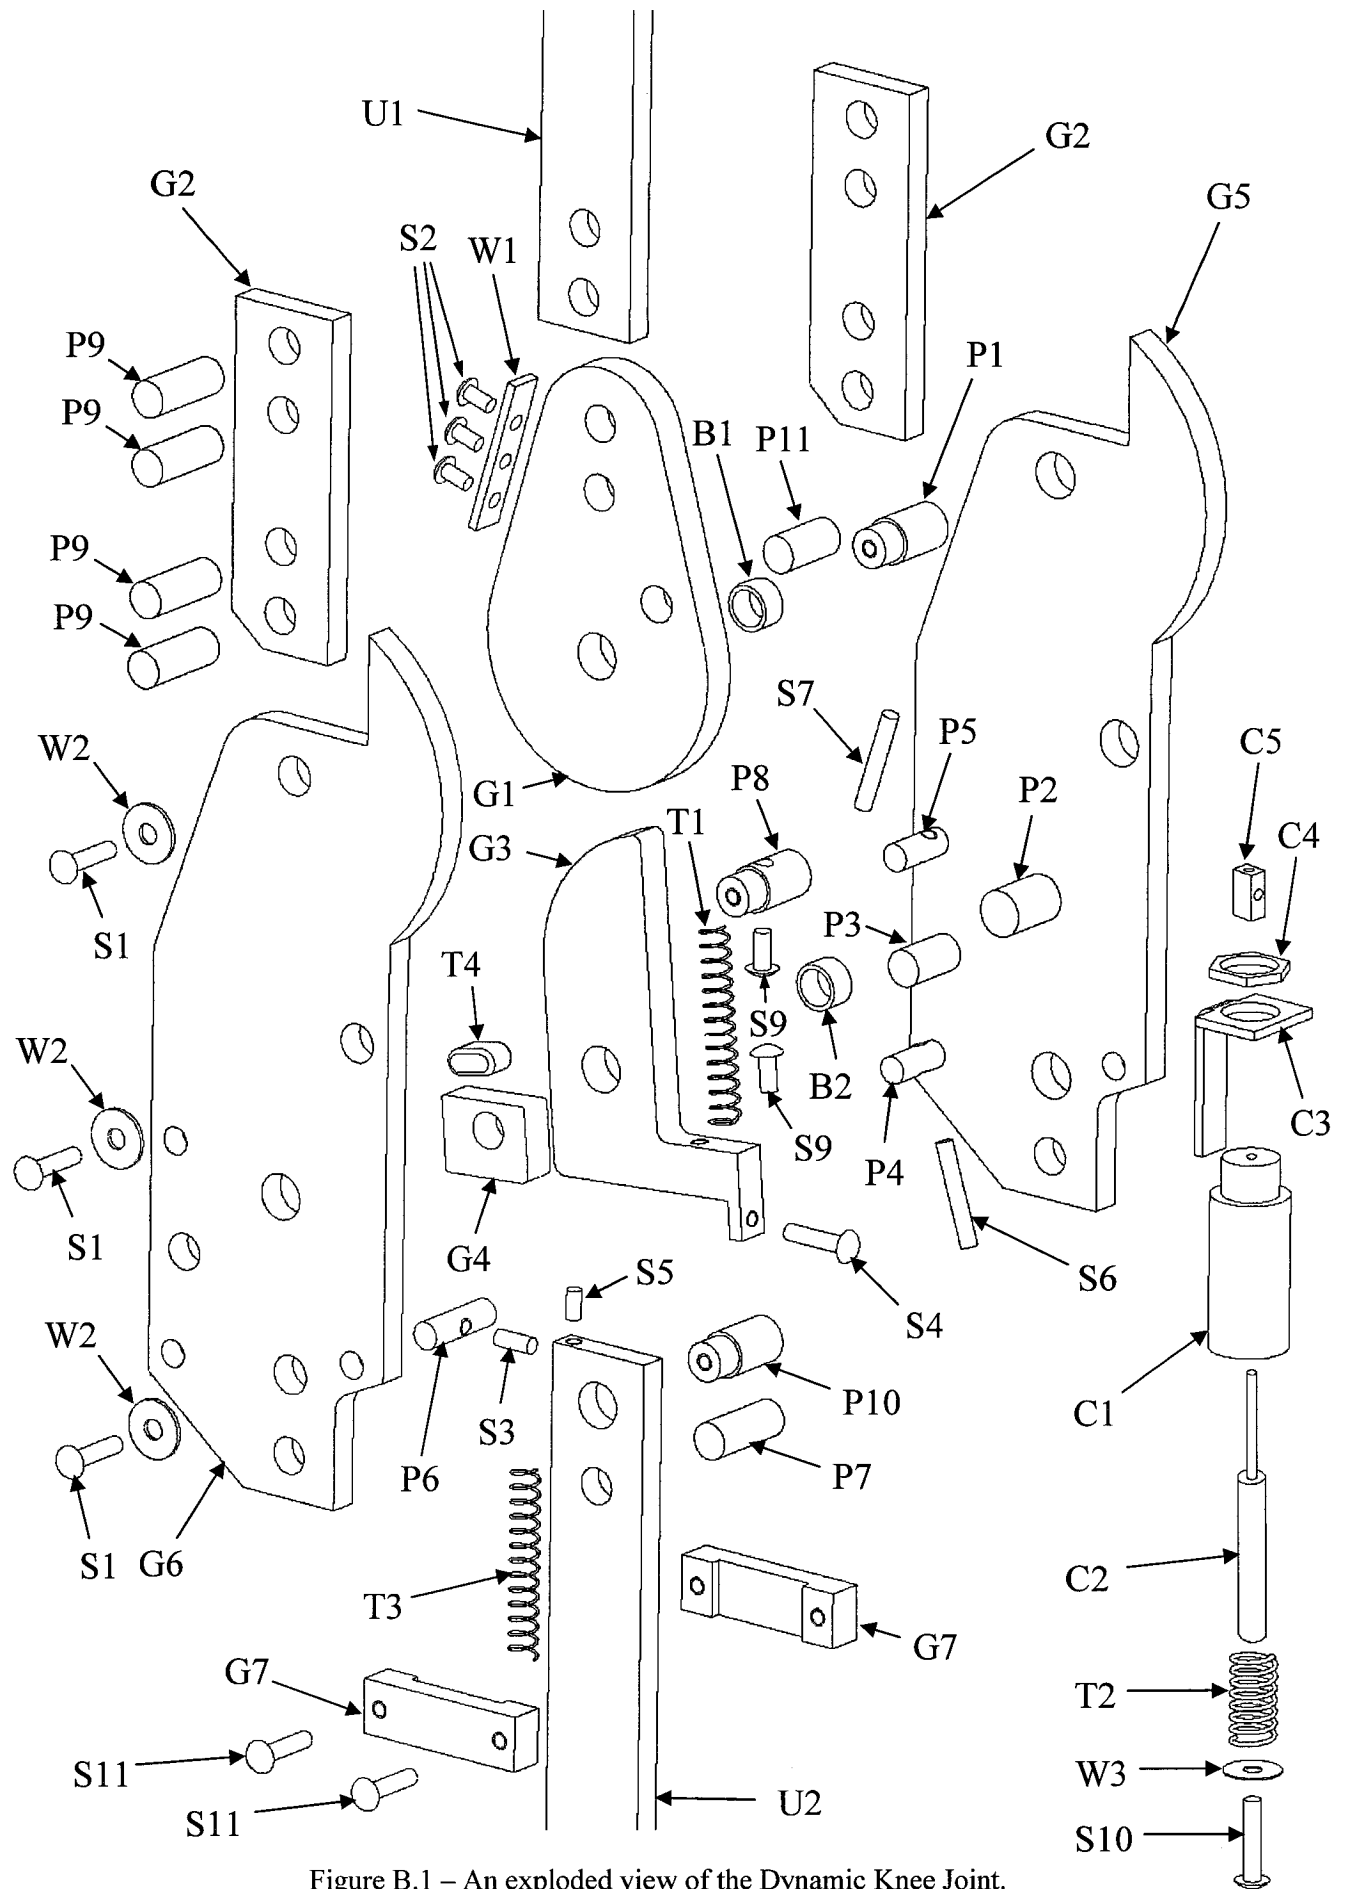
An exploded view of the Dynamic Knee Joint.
